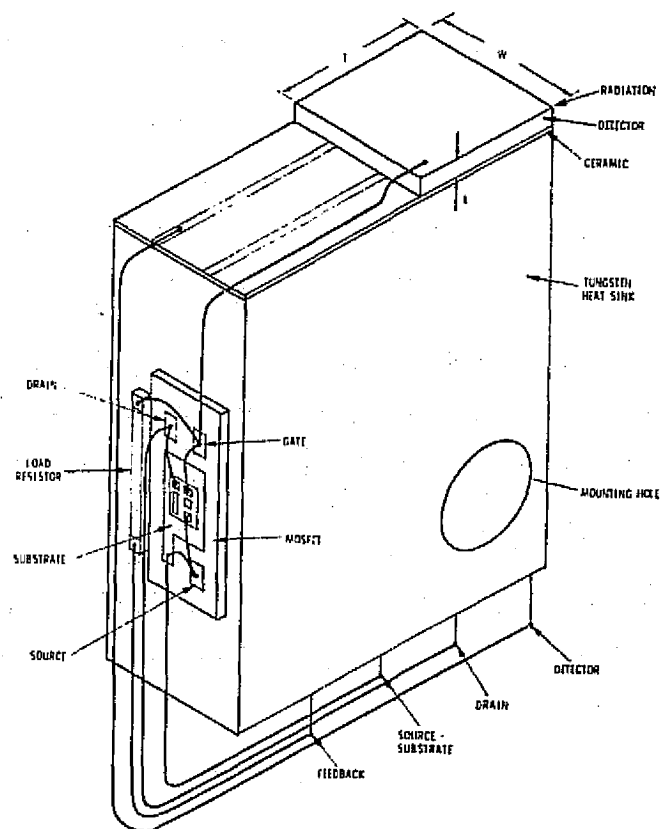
Detector - Cryogenic Preamplifier Assembly
